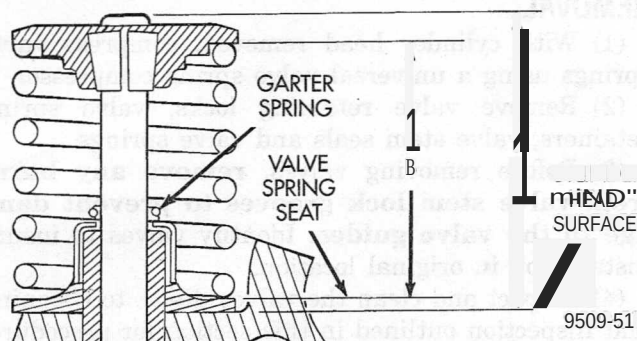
Checking Spring Installed Height and Valve Tip Height Dimensions
